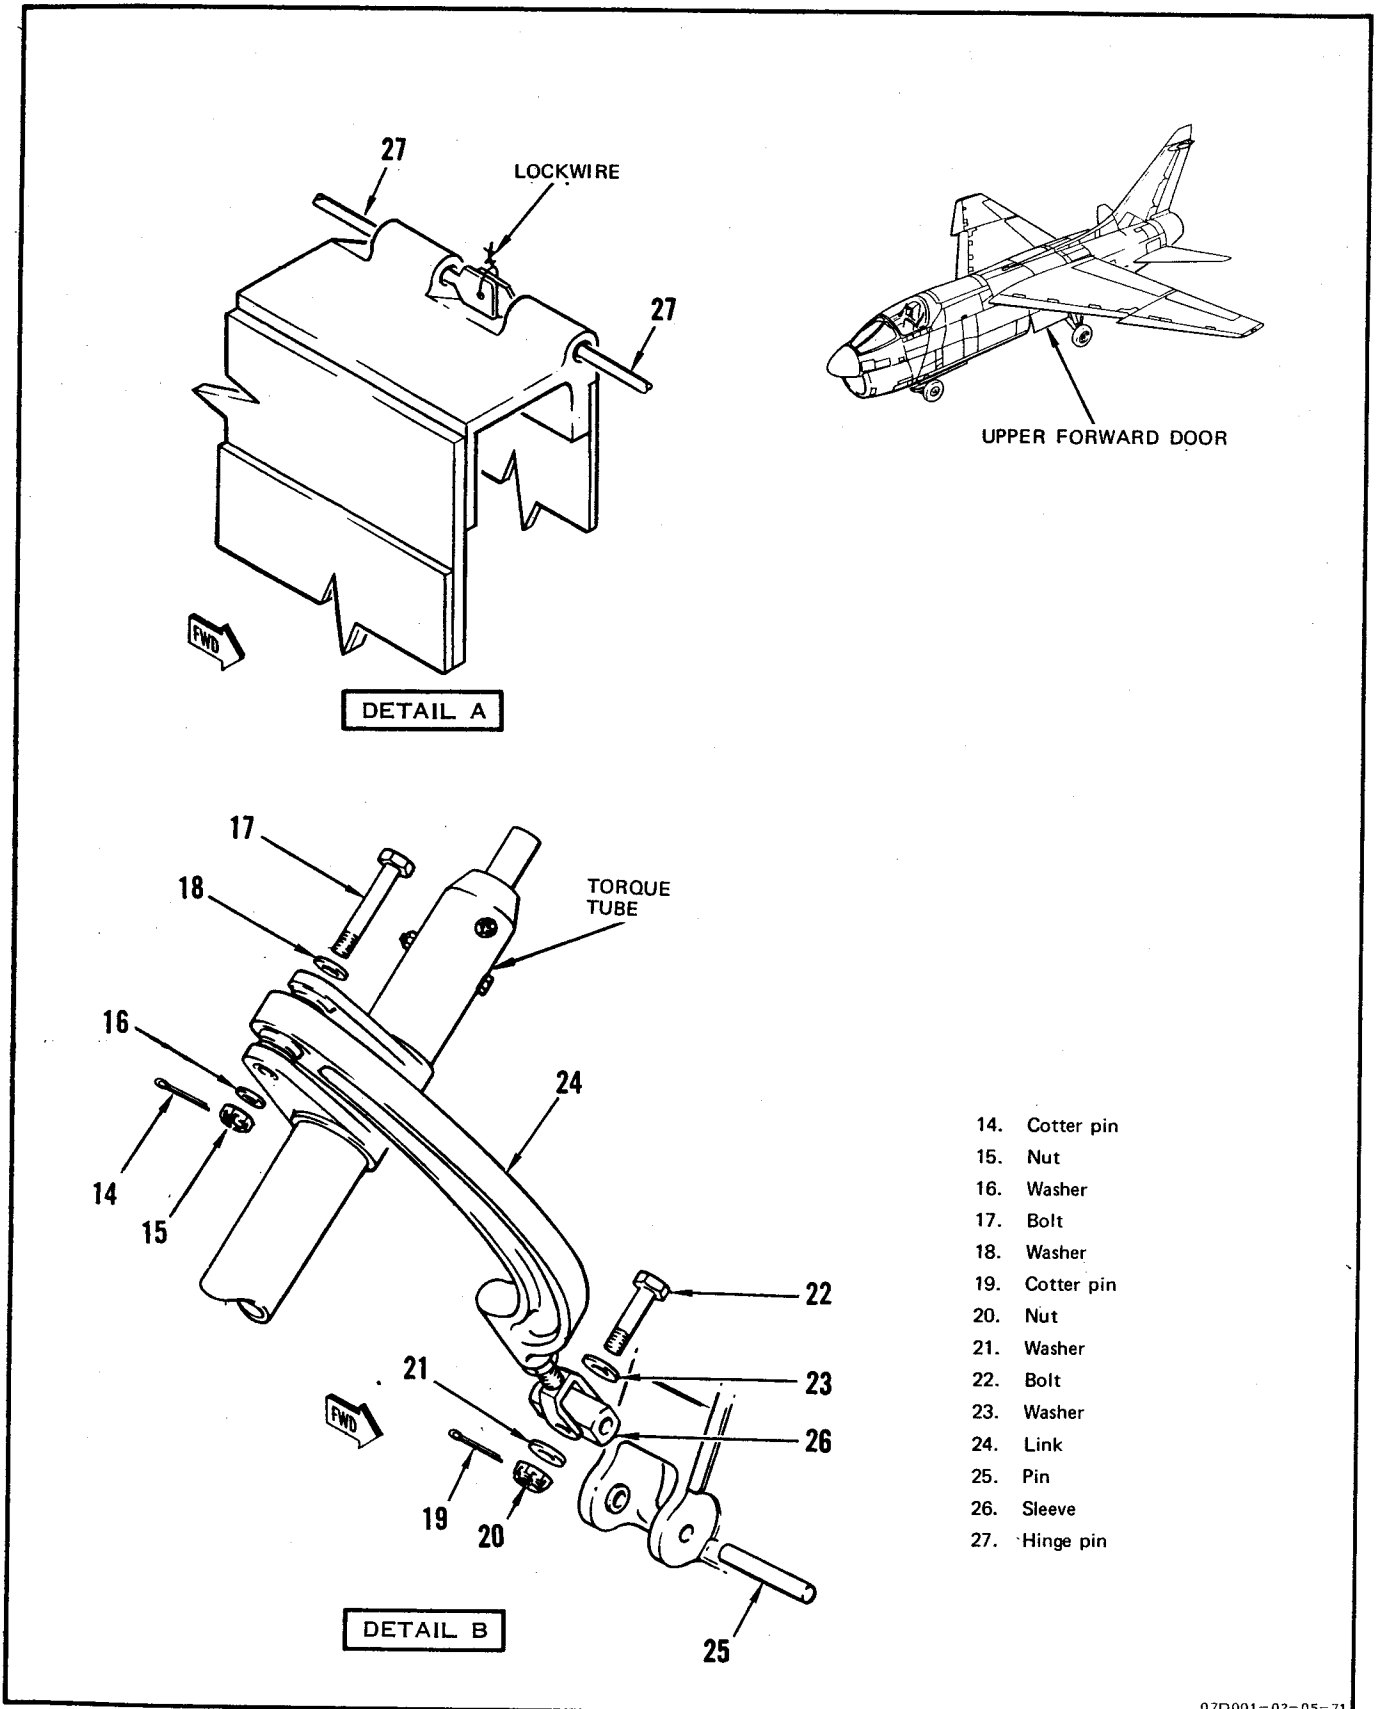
Main Gear Upper Forward Door Removal and Installation (Sheet 2)
